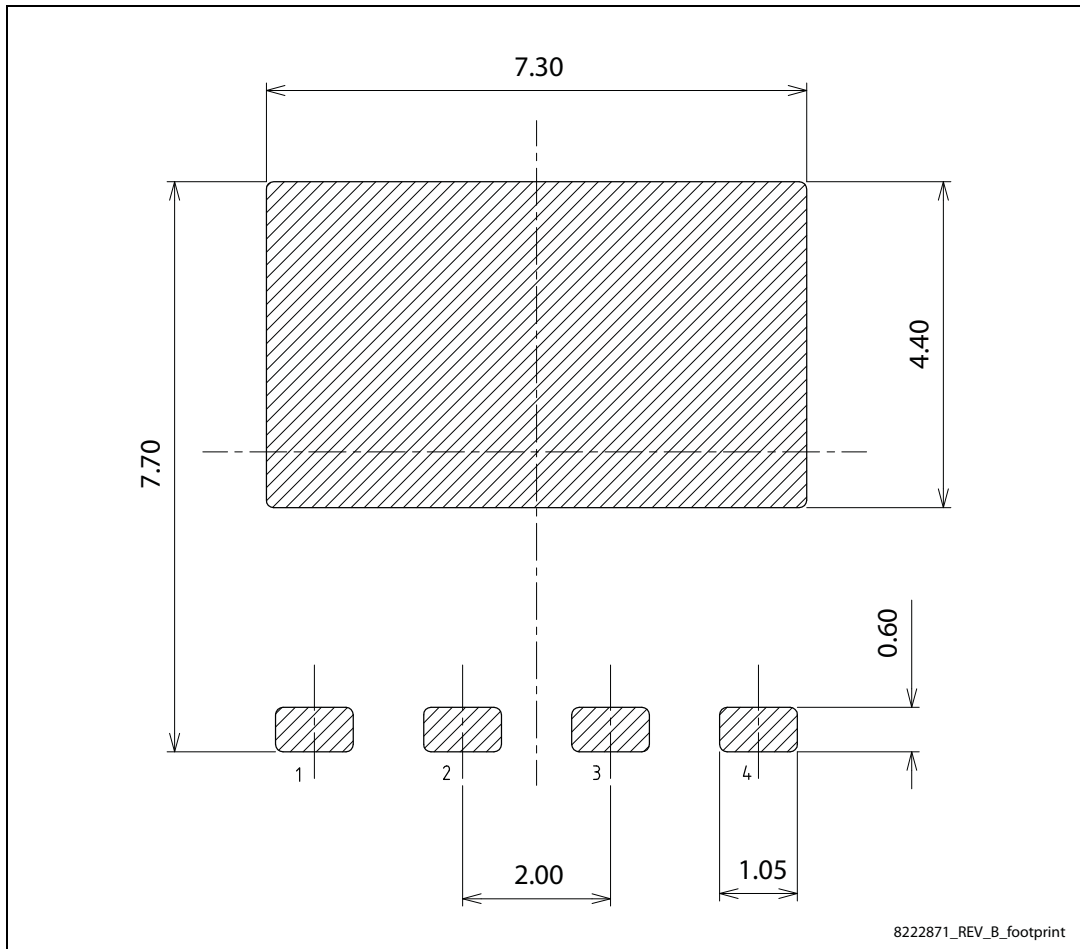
PowerFLAT™ 8x8 HV recommended footprint (dimension in millimeters)
